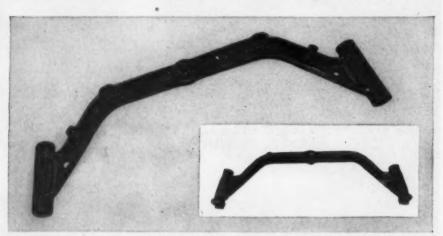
Weight reduced 30%...cost cut 43%. Present design, all welded steel front axle. Has pressed steel channel frame and steel spindle housings. Inset shows former construction of cast steel.
